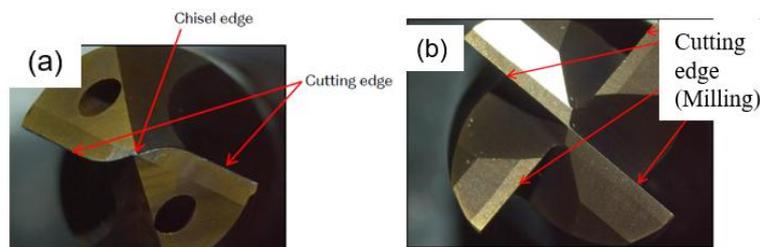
(a) Sandvik drill and (b) Technicut end mill
